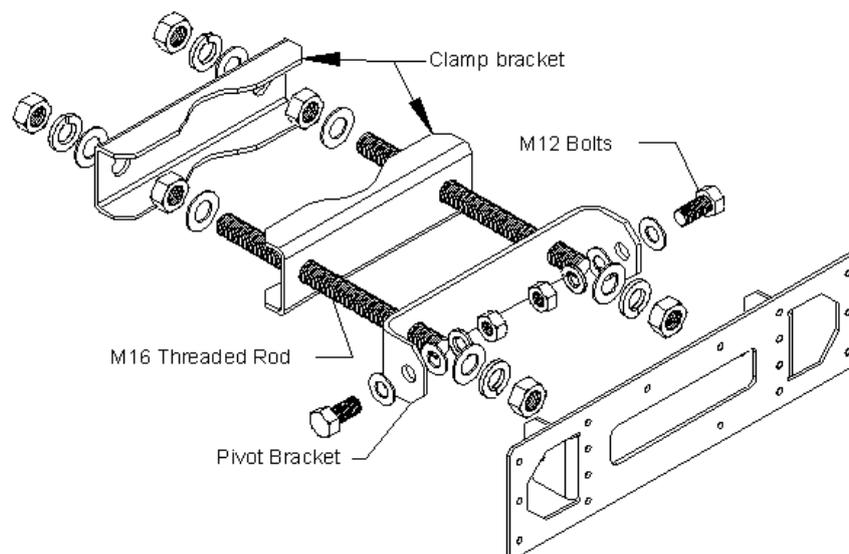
Fixed Downtilt Mounting Bracket Exploded Assembly
